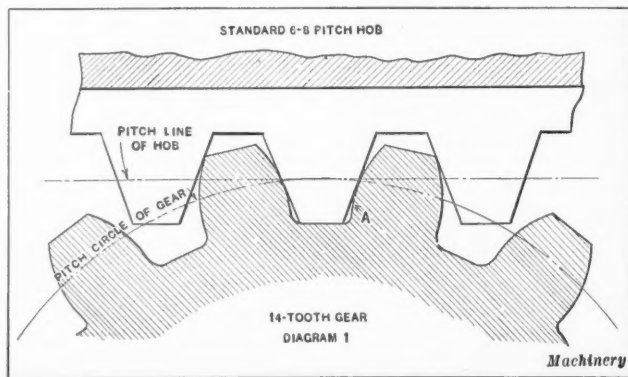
Cutting Fourteen-tooth Gear of Standard Depth without Backlash
